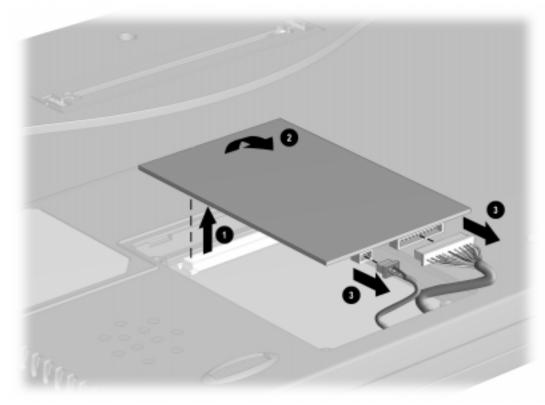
Removing the Modem or Modem/NIC Card Reverse the above procedure to install the modem or modem/NIC card.
